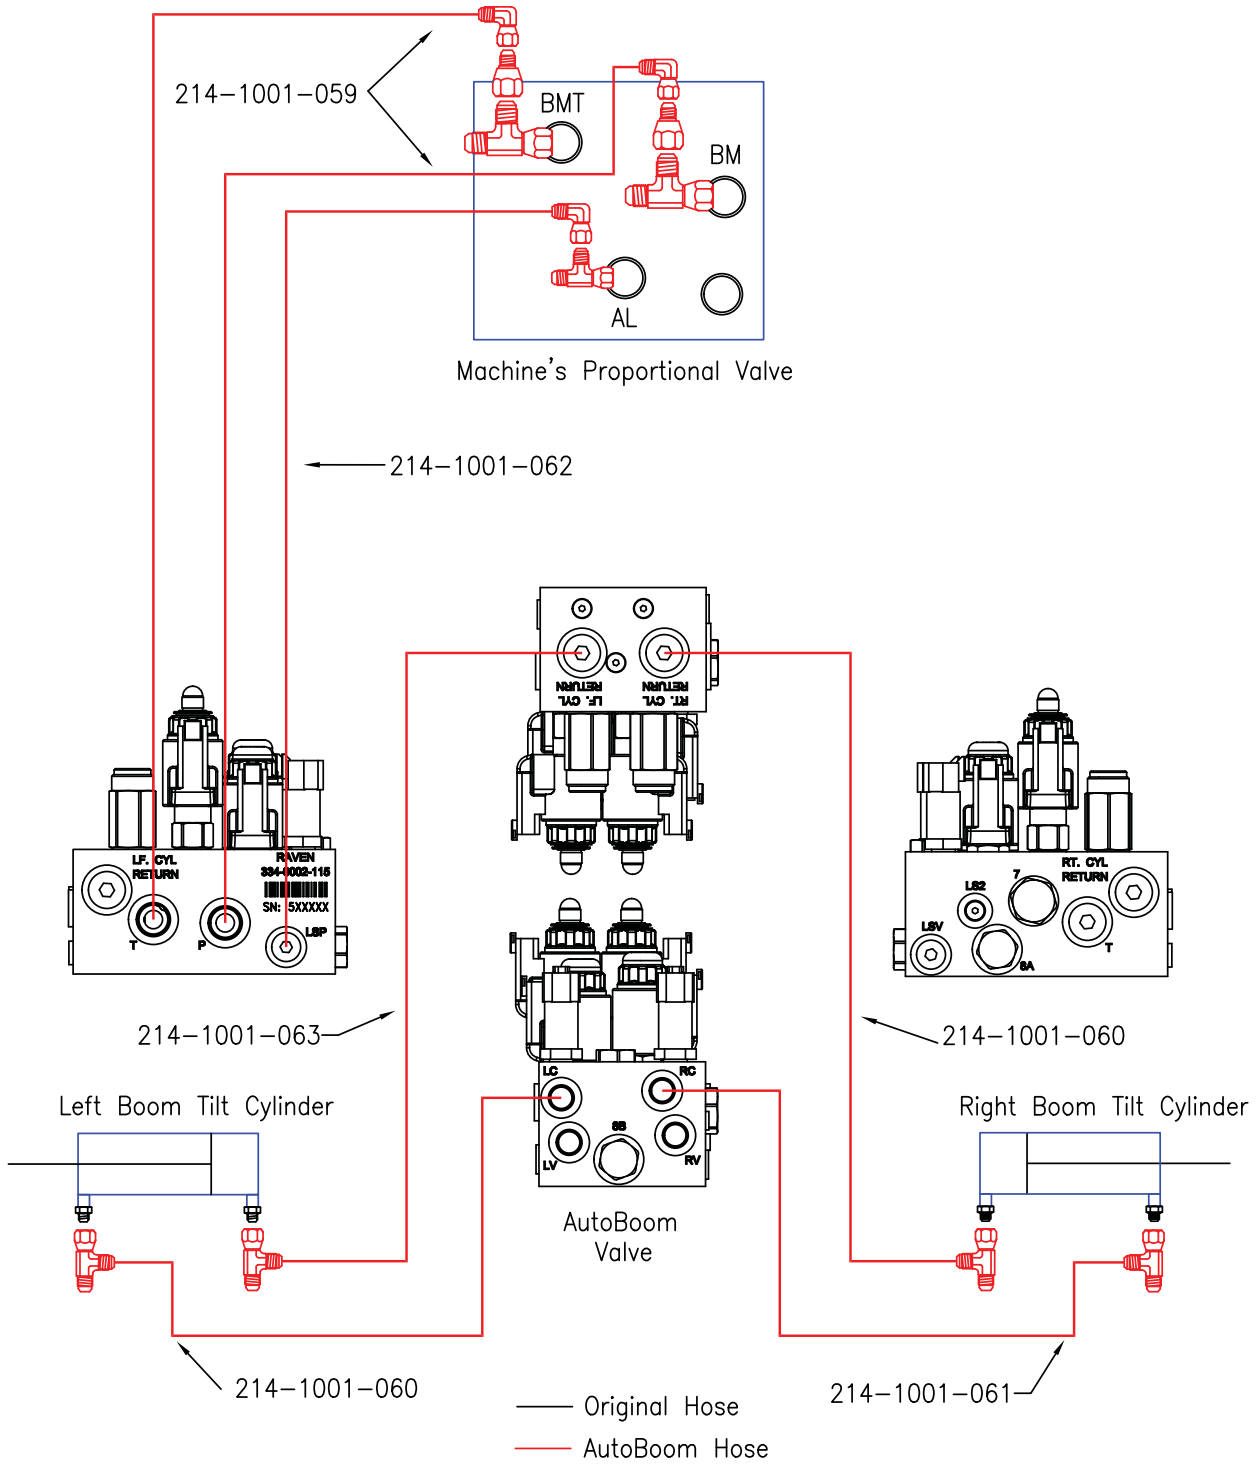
Load Sense Hose Installed on AutoBoom Valve
